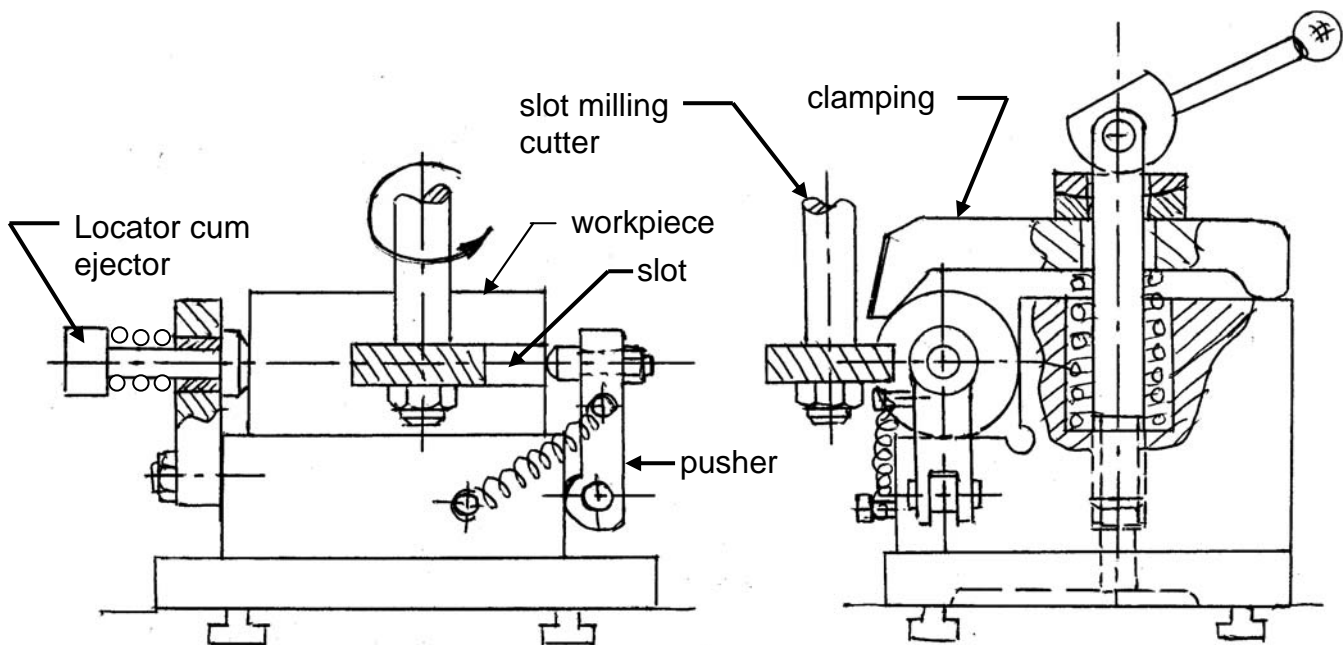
(b) Fixture for milling the slots on the rod.
